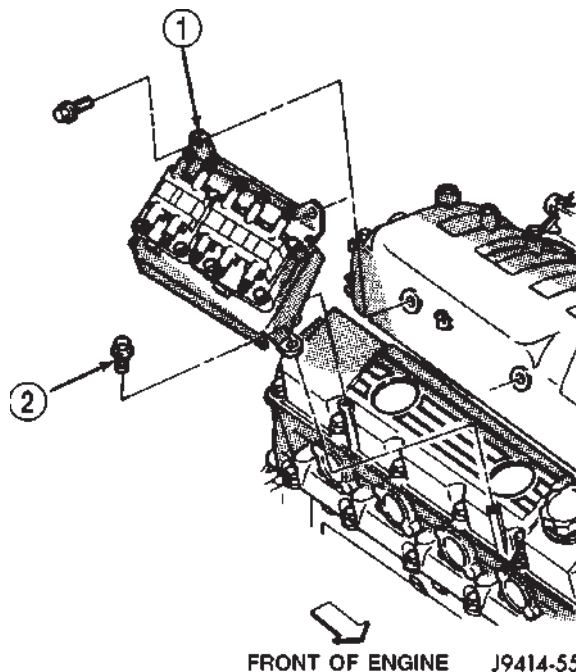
Ignition Coil Pack and Mounting Bracket—8.0L V-10 Engine
